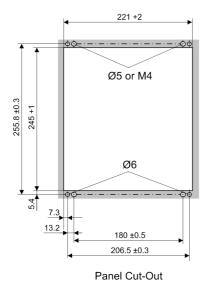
Dimensions of a 20-Hz-Generator 7XT3300-0BA00/DD for Panel Surface Mounting
